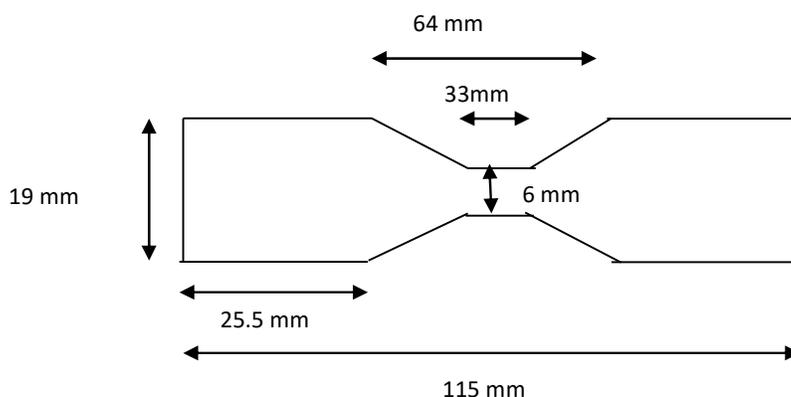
Specimen Tensile Strength Testing Based on ASTM D-638-72-Type IV
